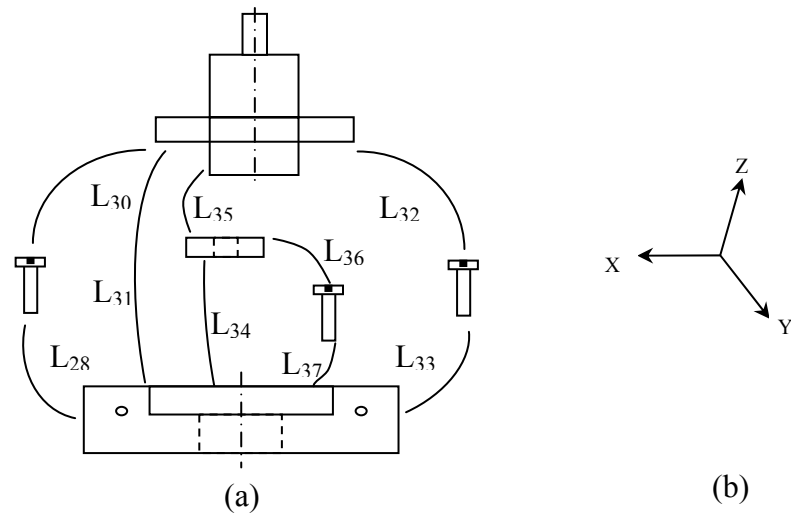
(a): Liaison graph model of electromotor subassembly; (b): Directions for assembly or disassembly
